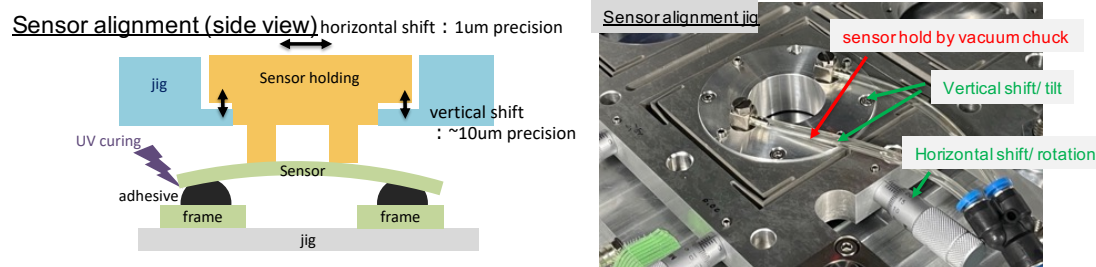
A schematic side view of sensor gluing jig (left). A top view of sensor gluing jig (right).
